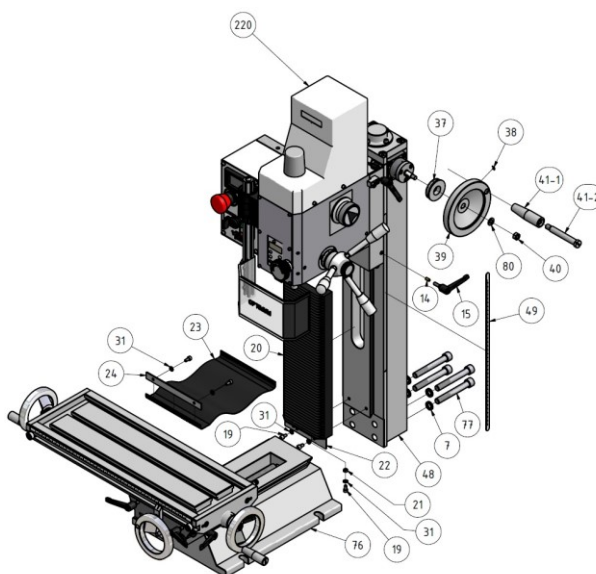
An exploded view from the manual of the BF20 Vario milling machine
